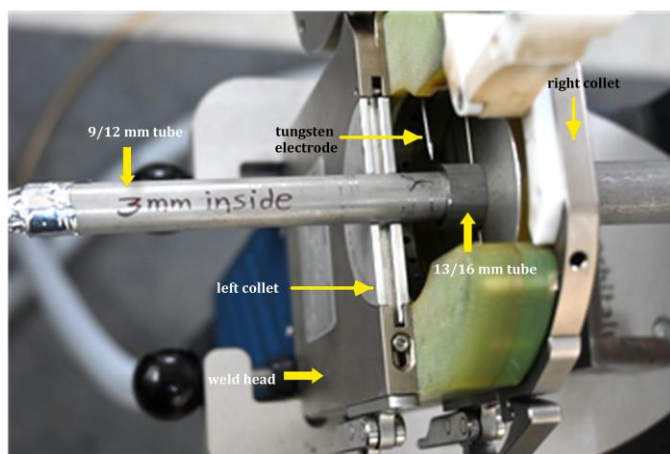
Typical welding set-up for 9/12 mm # 13/16 mm tube joint
